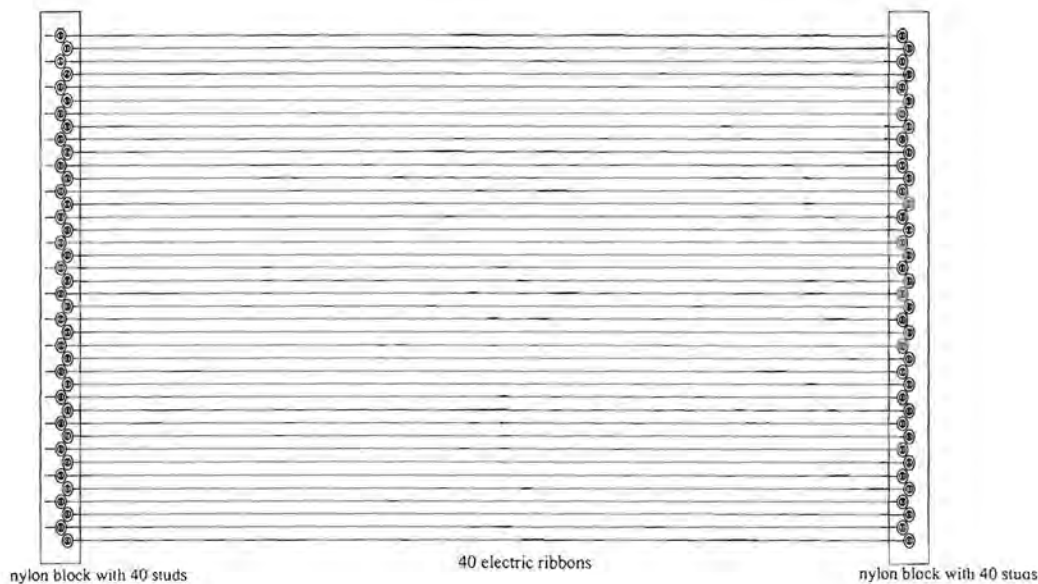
Schematic overview of the first configuration of the welding apparatus with 40 electric heating ribbons. In a later version, only every 4th ribbon was retained.
